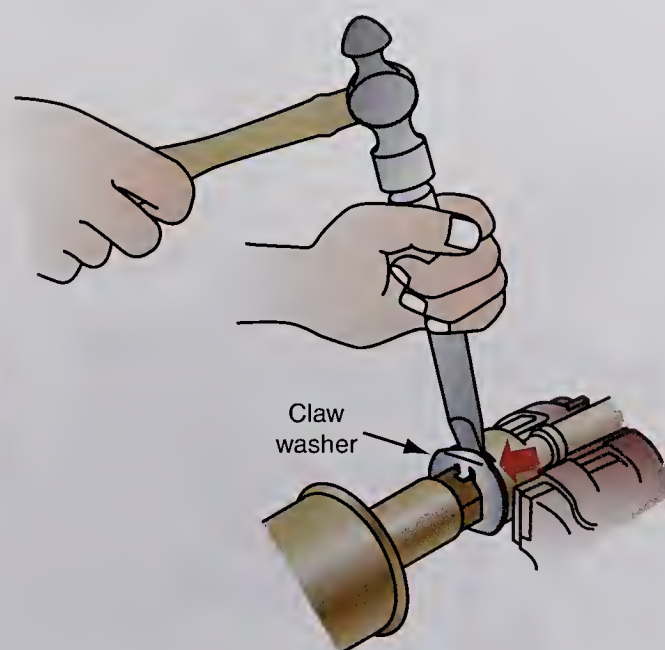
Staking claw washer on inner tie-rod end.
